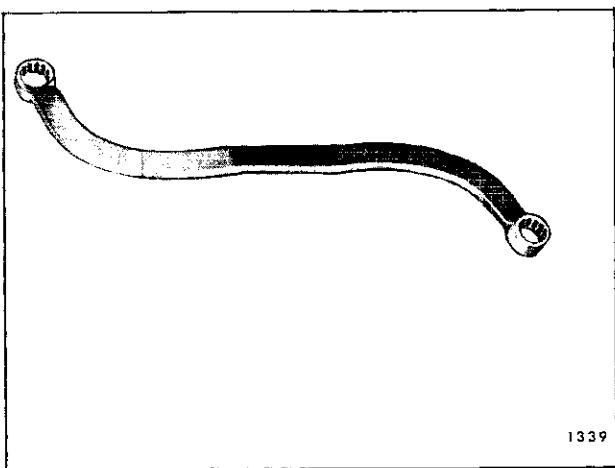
Front Door Hinge Tool J-21550 (1/2" Box) - "F, X & Z" Styles
